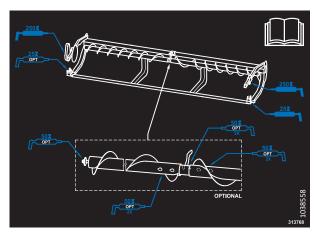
Decal for Single-Knife Header with Two-Piece Upper Cross Auger
